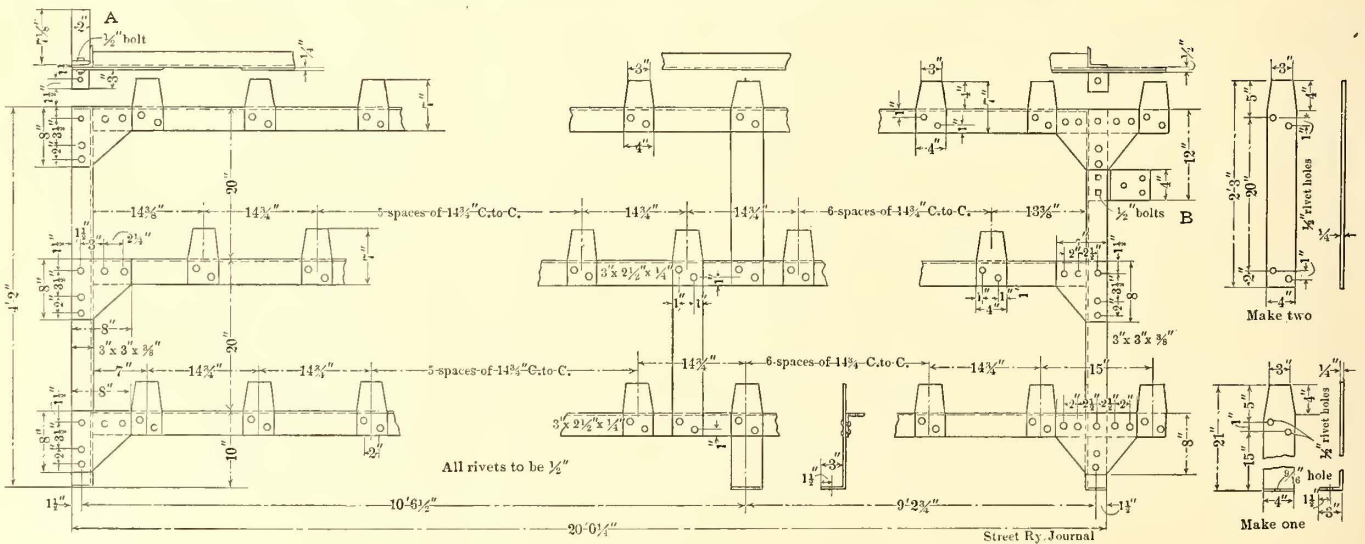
CONSTRUCTION DETAILS OF HEADLIGHT RACK
